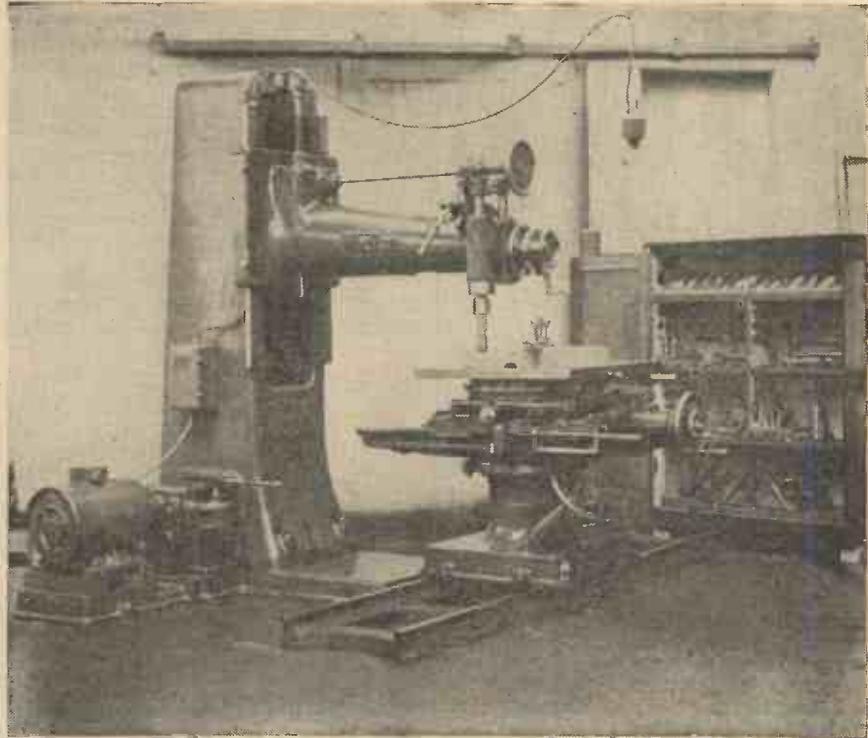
A semi-automatic pattern-milling machine made by Wadkin & Co., of Leicester. This machine rapidly carves intricate patterns and coreboxes out of blocks of wood.
